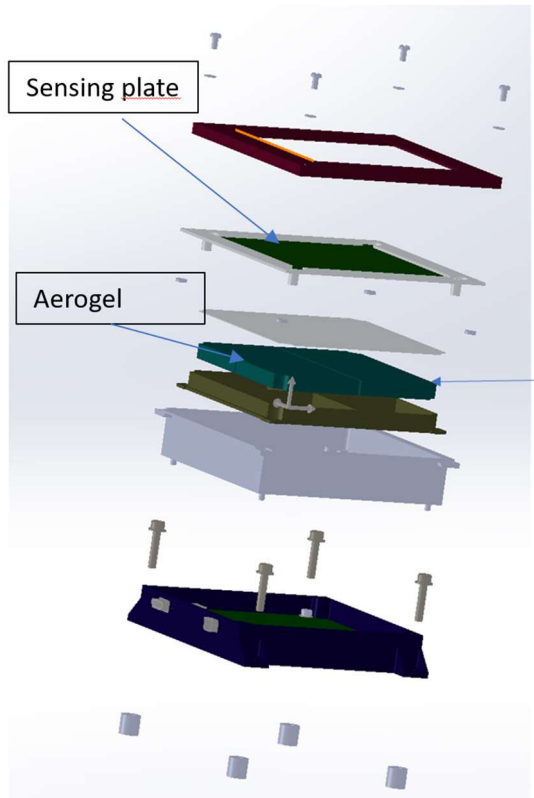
Exploded view of DISC highlighting the sensing element and the internal aerogel dust shield protecting the electronic boards.
